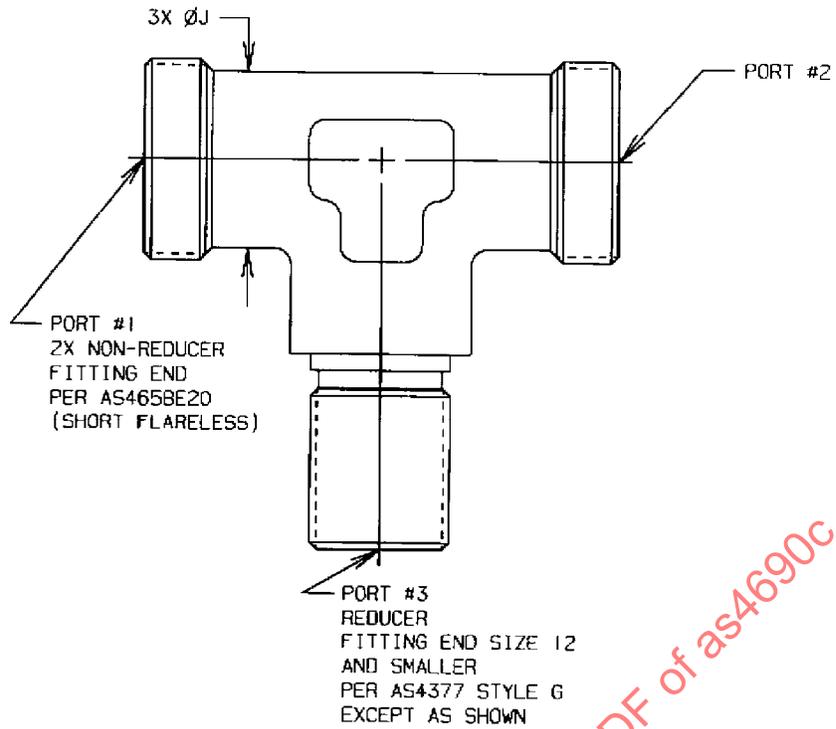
C - FITTING, TEE, SIZE 20 SHORT ENDS TO SIZE 12 AND SMALLER BULKHEAD REDUCER
